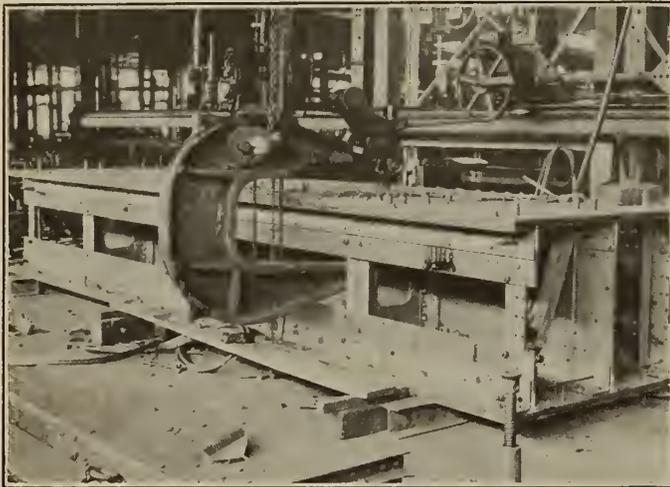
Fabrication of Main Span—Main Post Section—Assembly and Rivetting.
